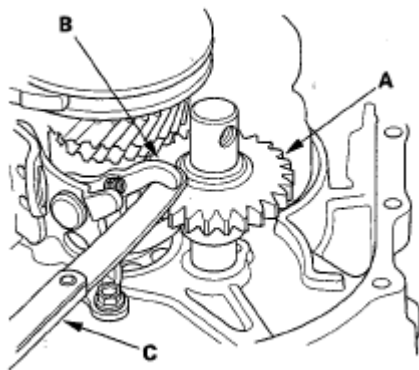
Measuring Clearance Between Reverse Idler Gear And Reverse Shift Fork
